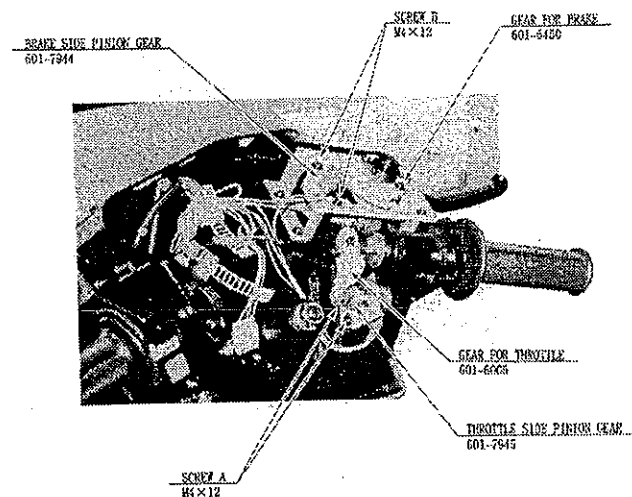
THROTTLE AND BRAKE GEAR ACCESS
